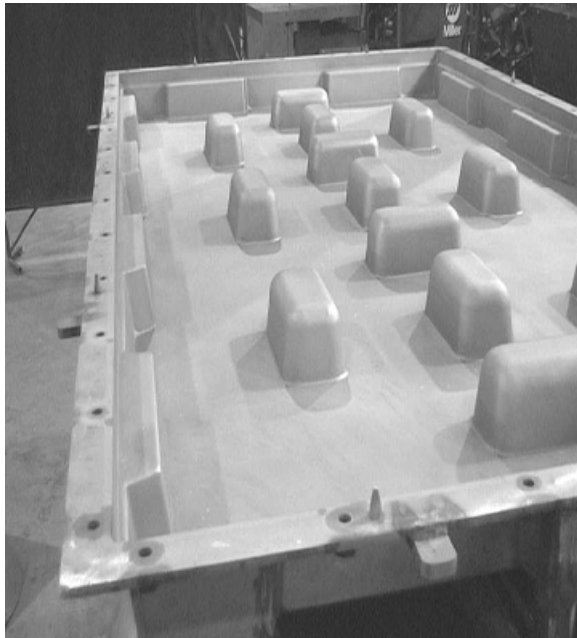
Flat bar parting line with alignment pins. (Courtesy of Rivers Metal Molds, Inc.)
